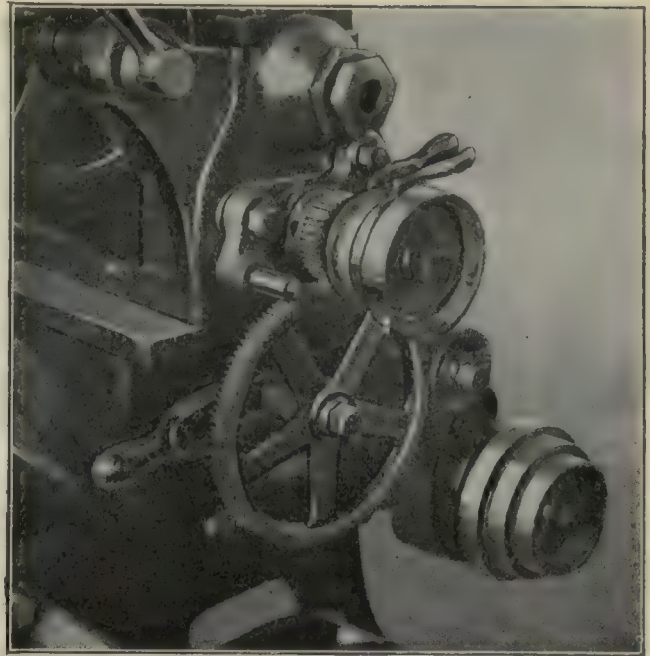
CHANGE GEARS SET UP TO CUT 3 IN. LEAD
